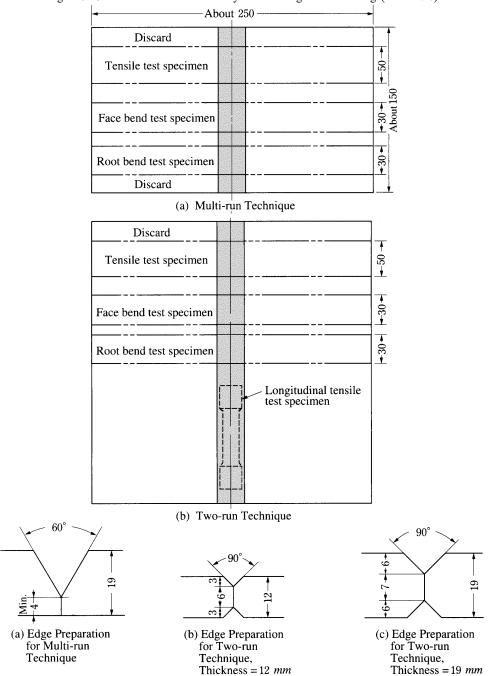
Butt Weld Test Assembly for Submerged Arc Welding (Unit: mm)
